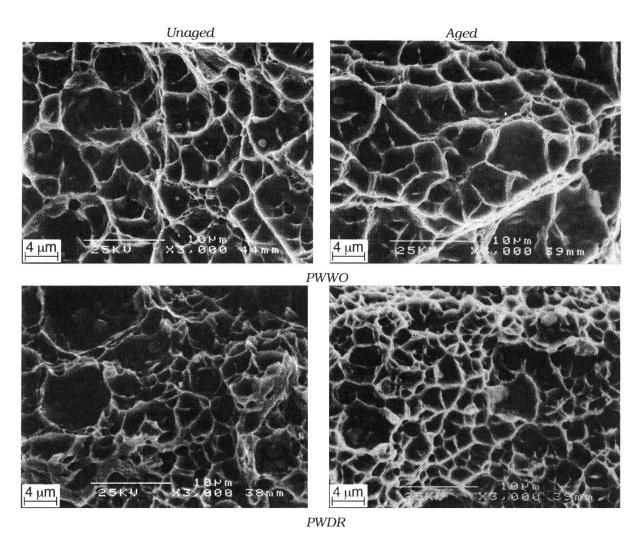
Higher-magnification photomicrographs of fracture surface of unaged and aged Charpy specimens of PWWO and PWDR welds tested at room temperature
